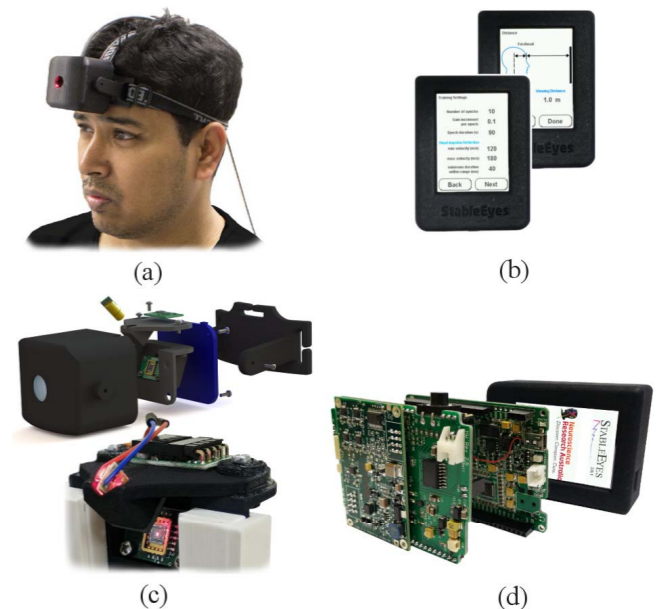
(a) A subject wearing the head unit; (b) Base unit, showing configuration screens; (c) Exploded view of the head unit showing MARG sensor array, and laser-on-mirror assembly (held in a calibration mount); (d) Exploded view of the base unit. Omitted for clarity: battery, speaker, vibration motor, various connectors.
